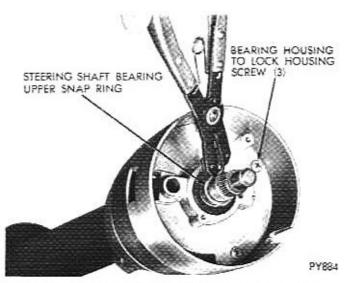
Steering Shaft Bearing Upper Snap Ring hub to press pin out of shaft, DO NOT HAMMER (Fig. 9).
